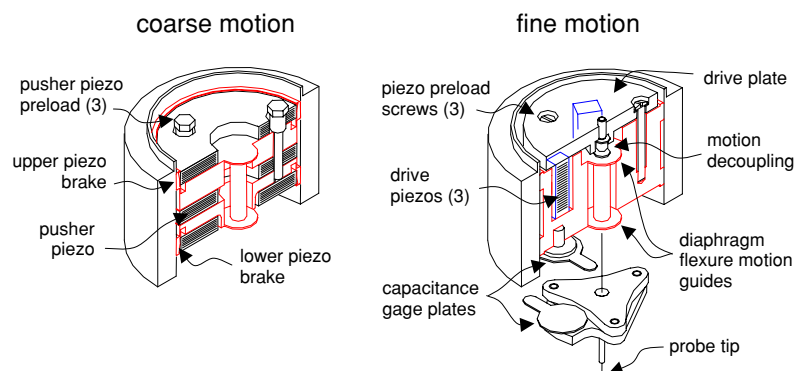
Probe actuator assembly exploded views, showing separately the detail of the coarse and fine motion mechanisms. The coarse motion is a linear piezo stepping motor. The fine motion is a folded, piezo-driven, flexure-guided system, with a capacitance gauge sensor.
